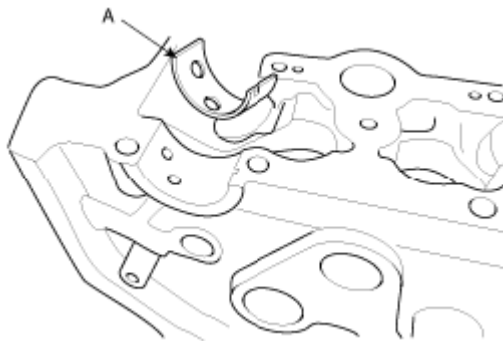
Identifying Exhaust Camshaft Lower Bearing
